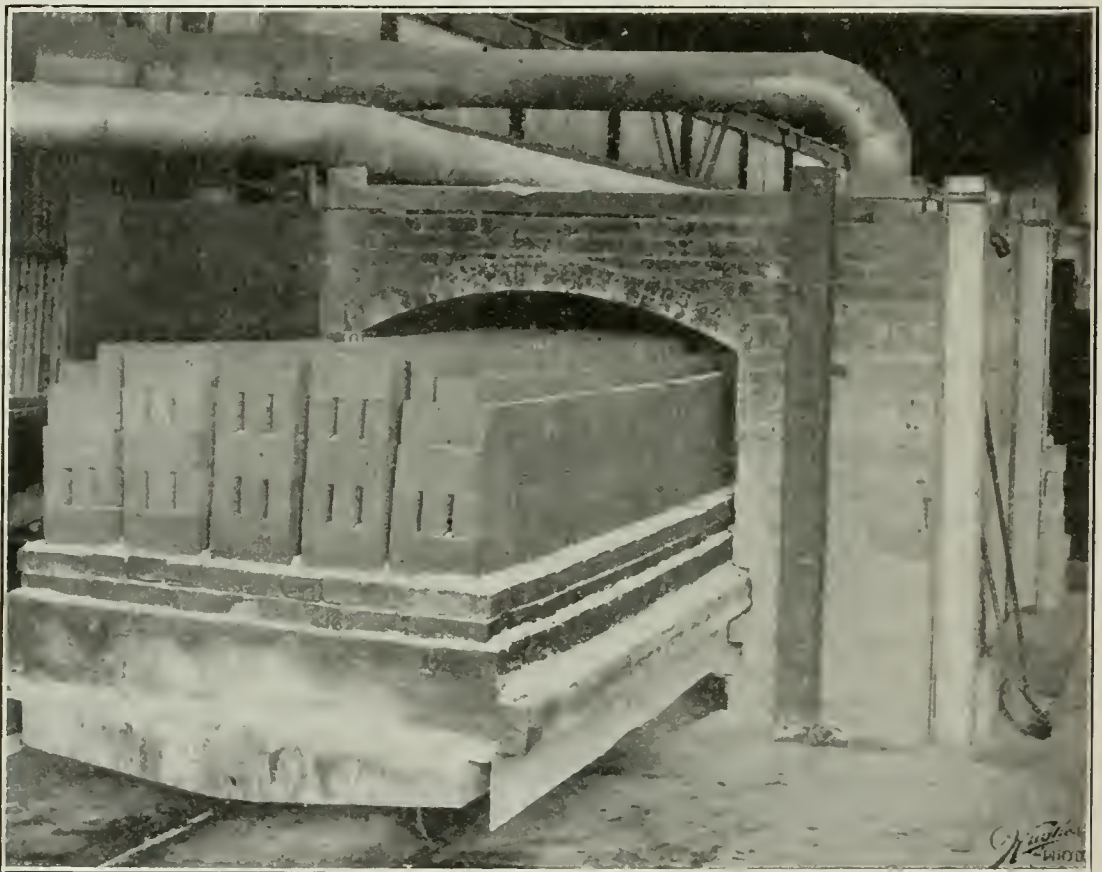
California Mullite brick being fired in tunnel kiln at Cone 28, Vitrefrax Co., Los Angeles.
